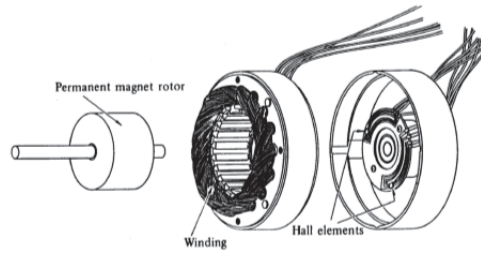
Disassembled view of a BLDC motor: PM rotor, winding and Hall elements
